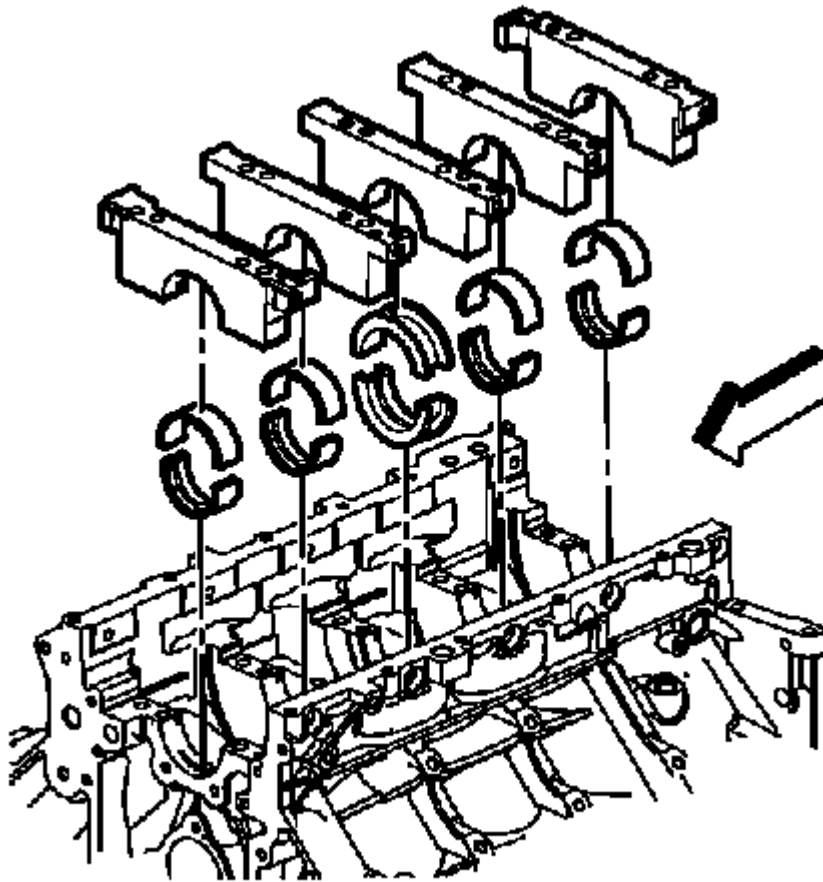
View Of Crankshaft Bearings & Bearing Caps
